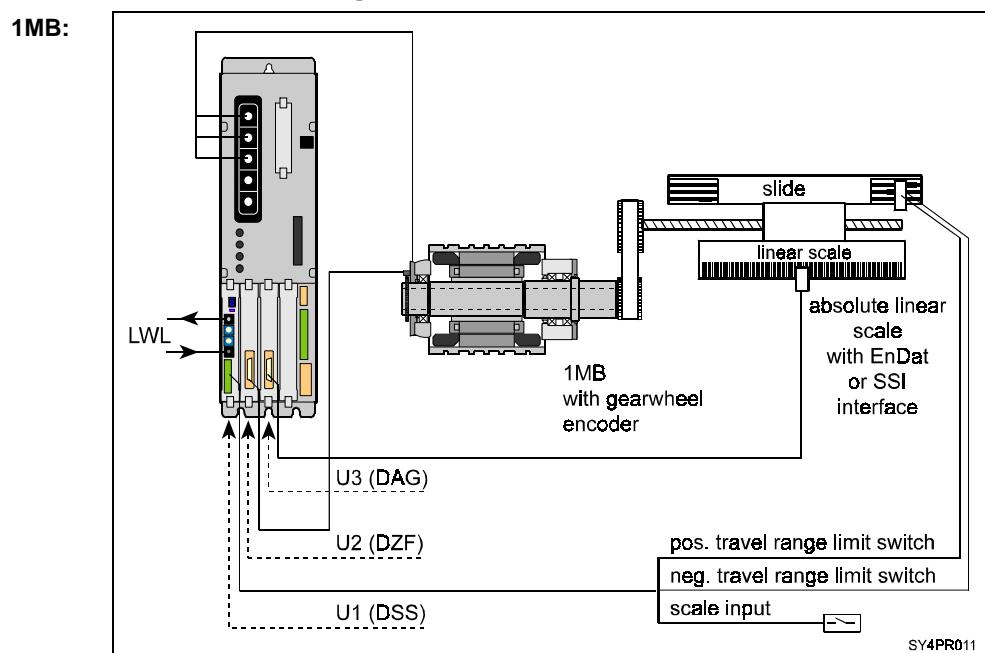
Drive with 1MB motor with gearwheel encoder with direct absolute position detection
